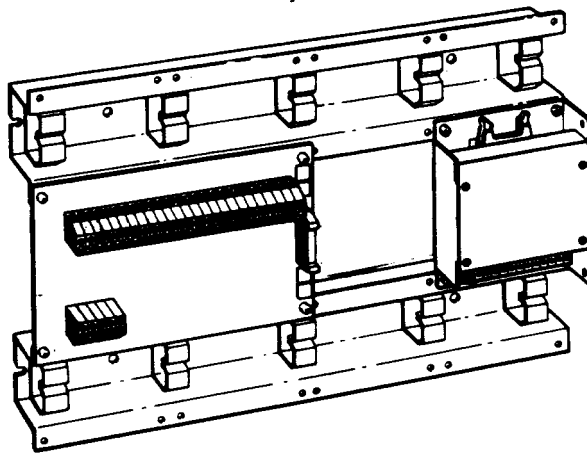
Typical Mounting Details of Termination Unit and Panel
